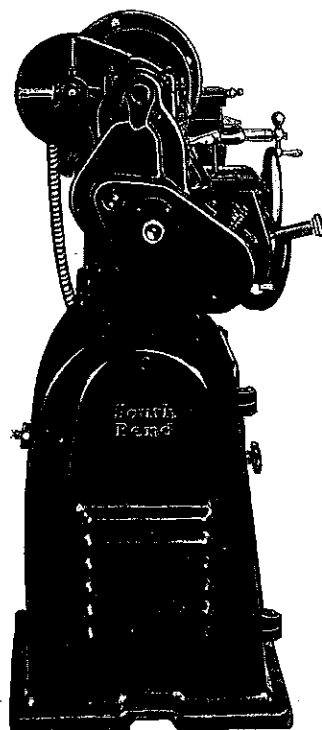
End view of Underneath Belt Motor Driven Lathe, showing removable ventilated end plate
